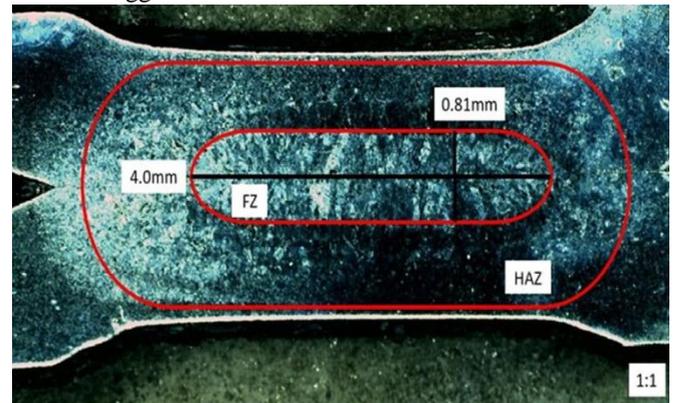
Macrostructure of weld-adhesive bonded sample.
